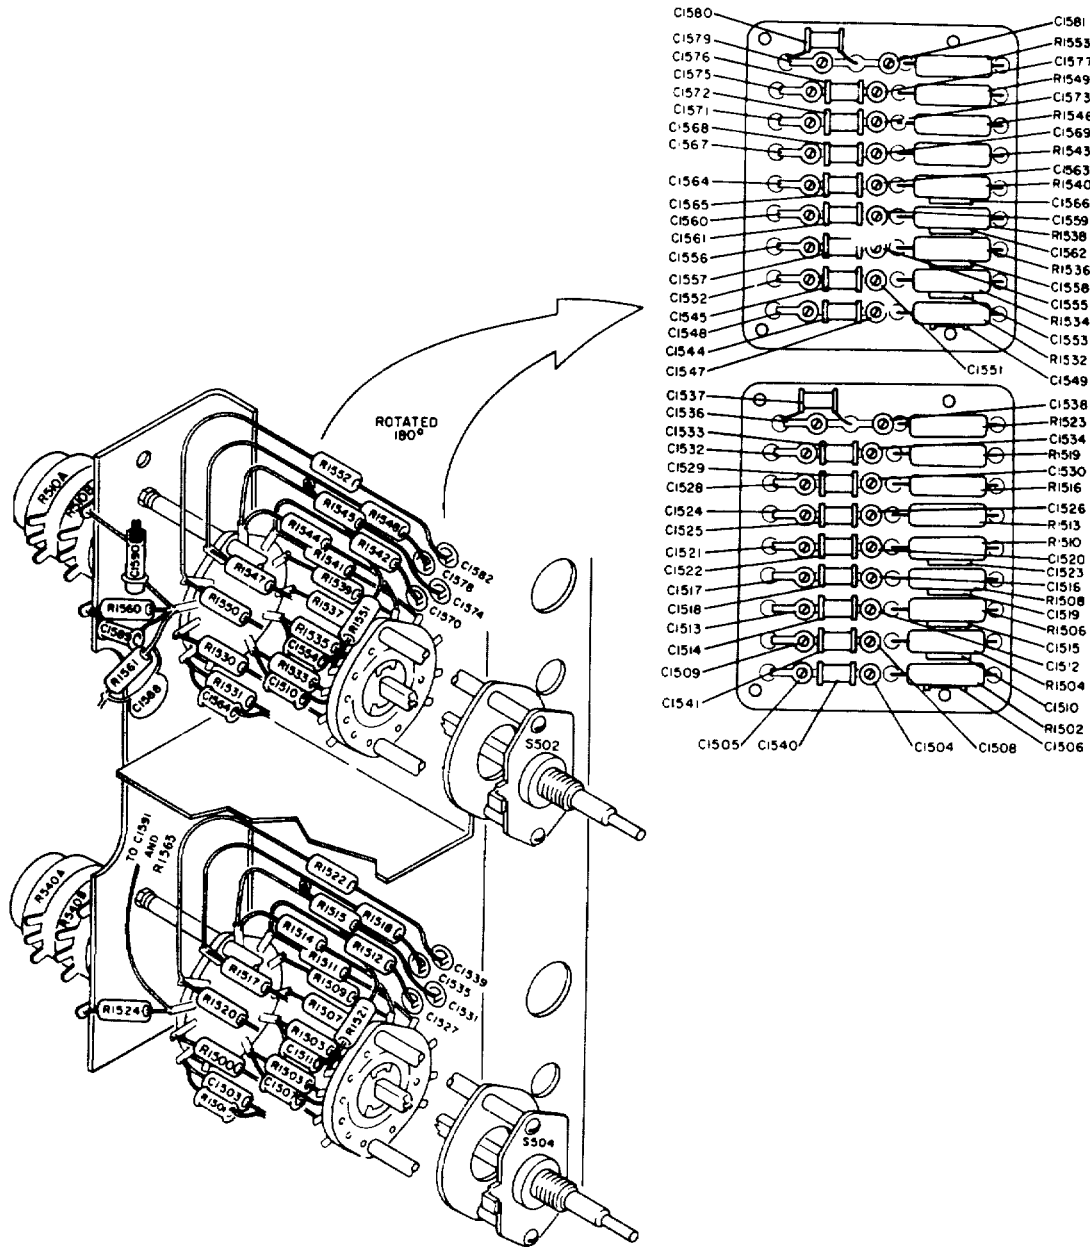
MX-2930B/USM Vernier/Sensitivity Switch Assembly, Location of Parts
